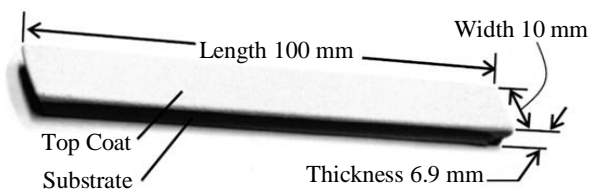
Illustrate coating and substrate in specimen with dimensions
